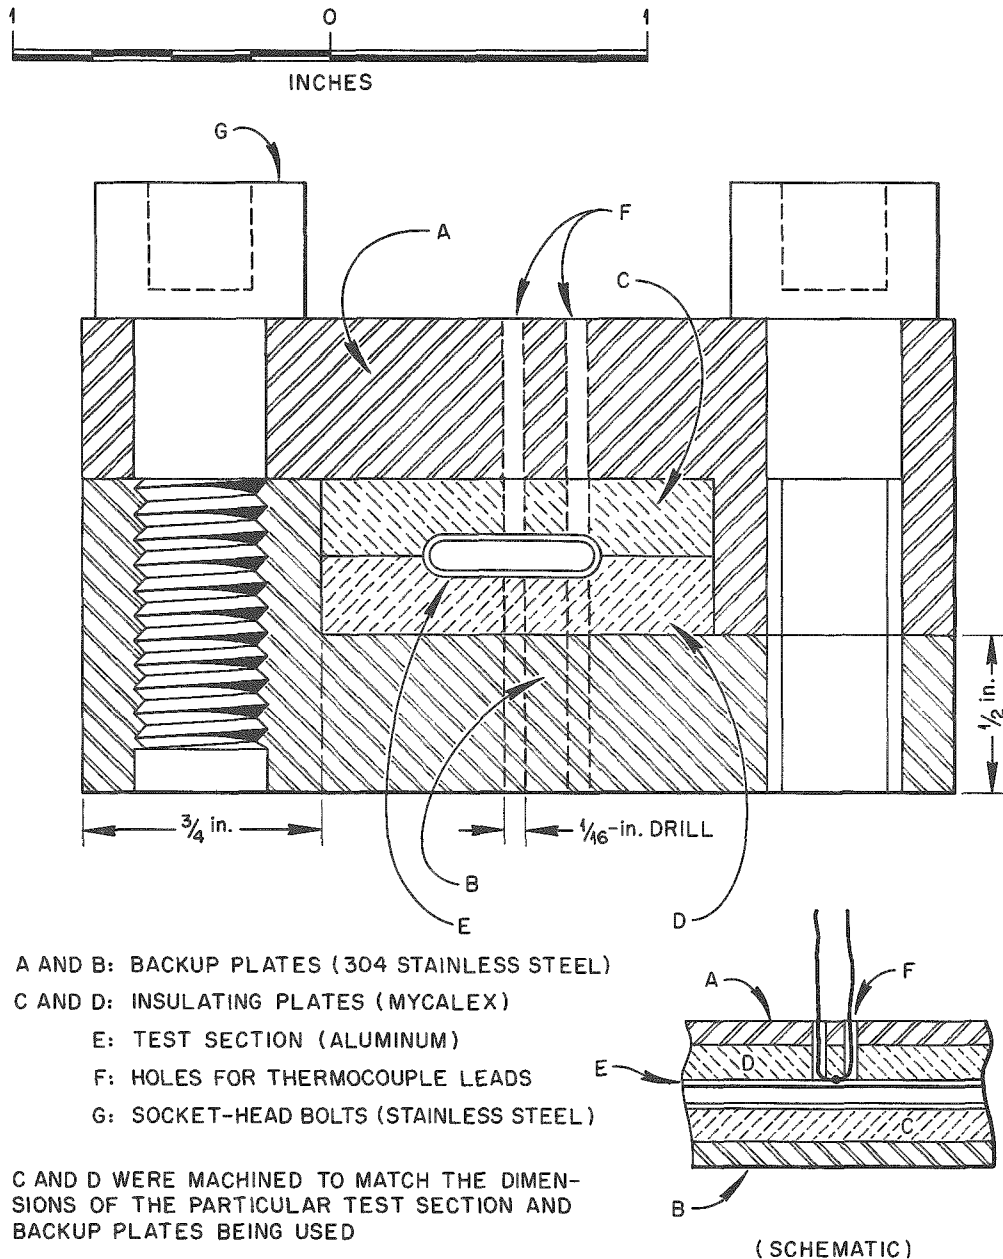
Cross Section of Aluminum Test-Section Assembly.
